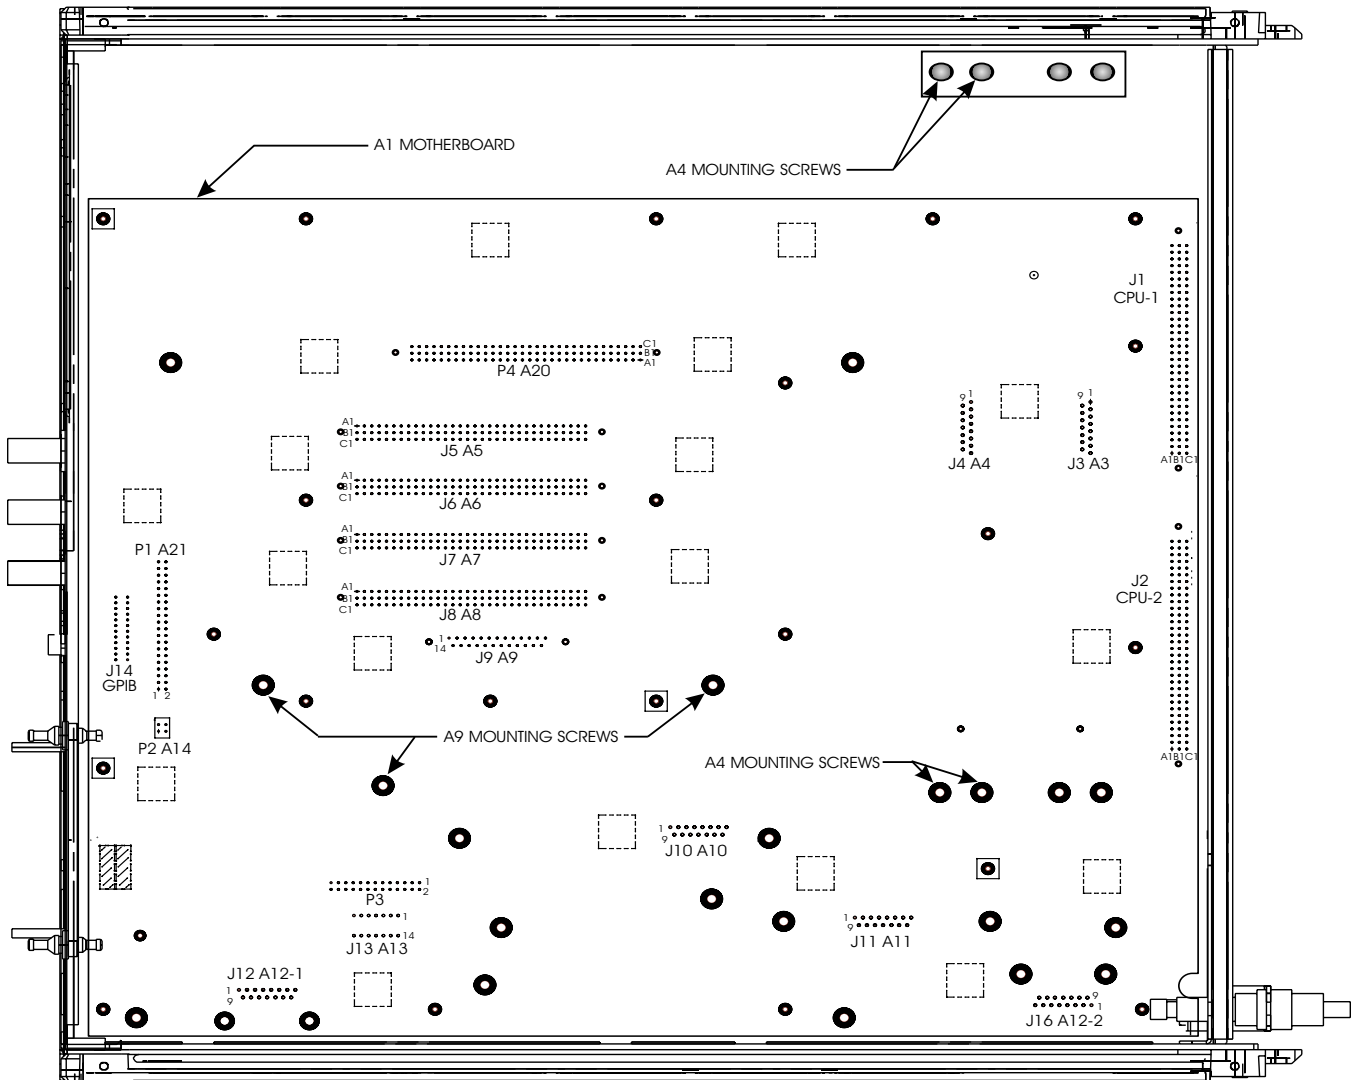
Bottom View of the MG369XA Showing Connector and Test Point Locations
